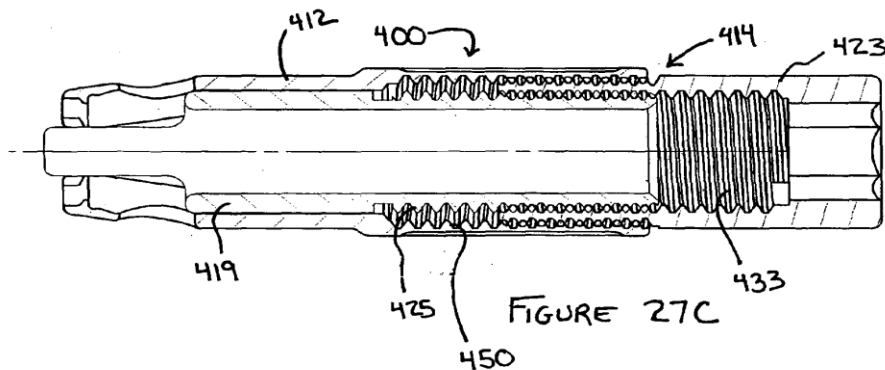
C is a side view in cross section of Runco’s instrument. *Id.* ¶ 53. This figure illustrates rod adjusting tool 414, which includes “distal component 419 having a rod engaging surface 421 and a proximal component 423 connectable to and separable from the distal component 419.” *Id.* ¶ 104 (emphasis omitted). Runco explains that “[i]n operation, rotation of the proximal component 423 causes the distal component 419 to advance axially relative to the bone anchor engaging tool 412.” *Id.
